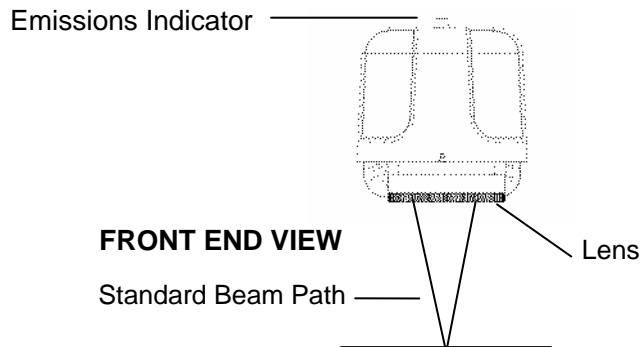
End View of Standard Marking Head Assembly Configuration
